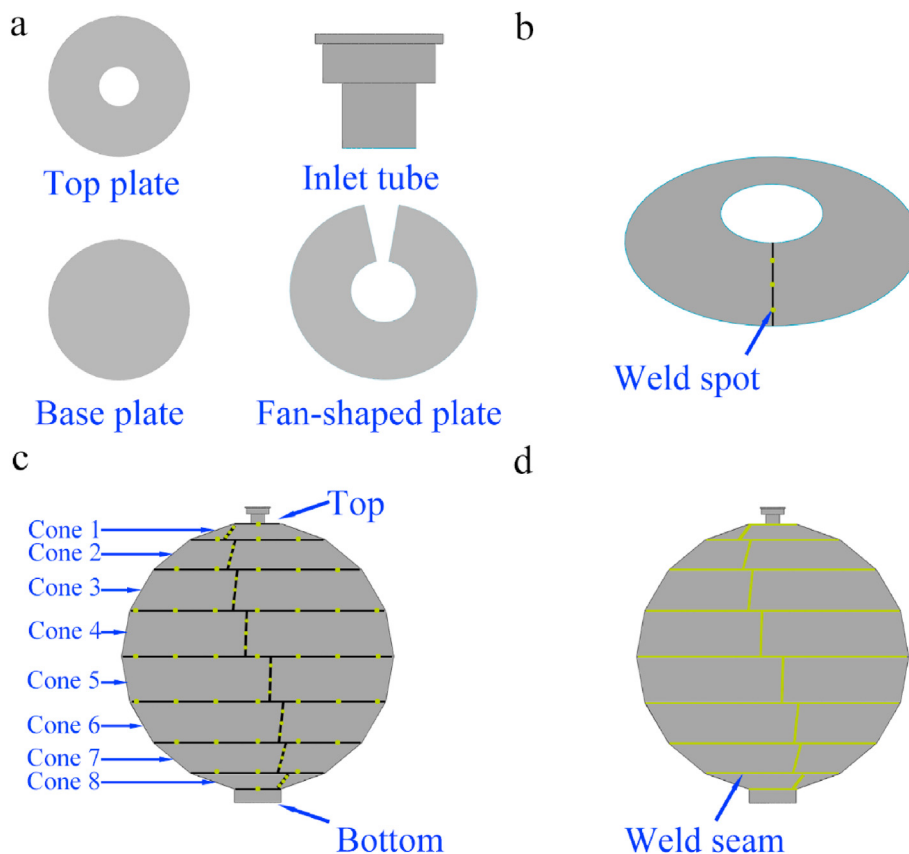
Manufacturing procedures of the longan-shaped polyhedral preform: a = numerical blanking, b = bending, c = spot welding, and d = seam welding.
